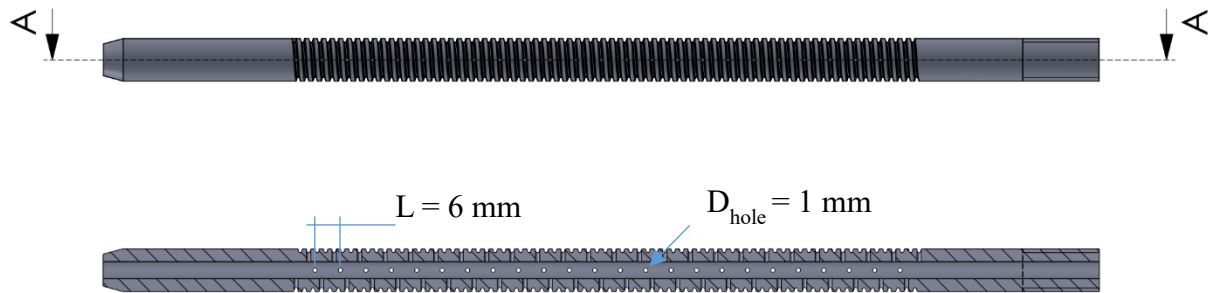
3rd configuration (Tube 3) of the injection tube used in test Q5.
